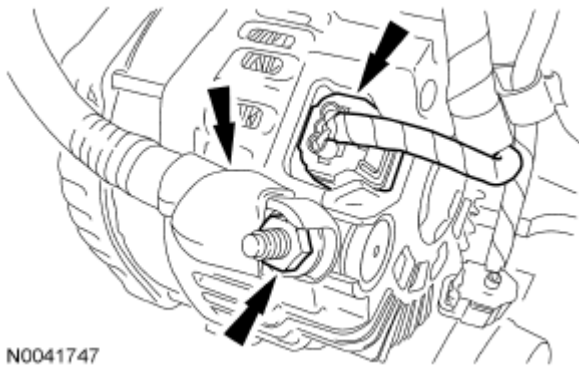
Locating Generator B+ Cable, Electrical Connector And Nut
